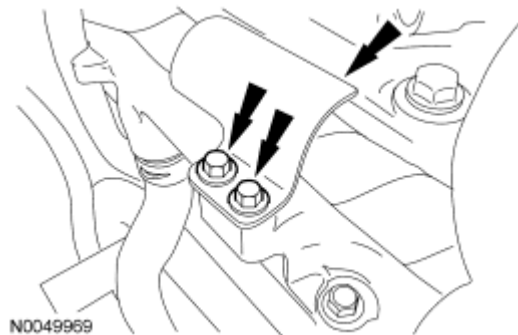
Locating Wiring Harness Retaining Bracket & Bolts
